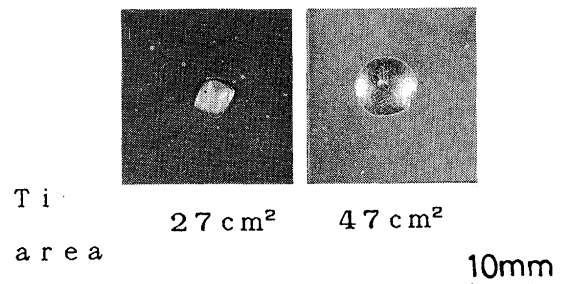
Appearance of spread test specimen tested at different surface area of getter titanium plate.
